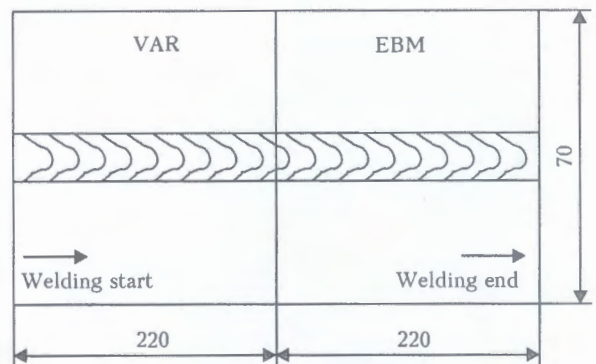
Scheme of welding of specimens by AAW, AAW over flux and EBW methods
